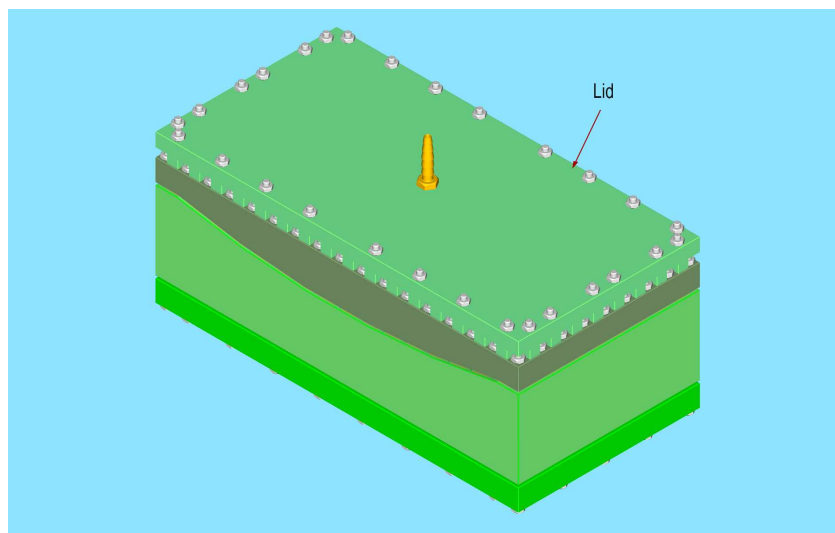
Vacuum chamber equipped with lid allowing molding of Mylar film at higher pressures.
